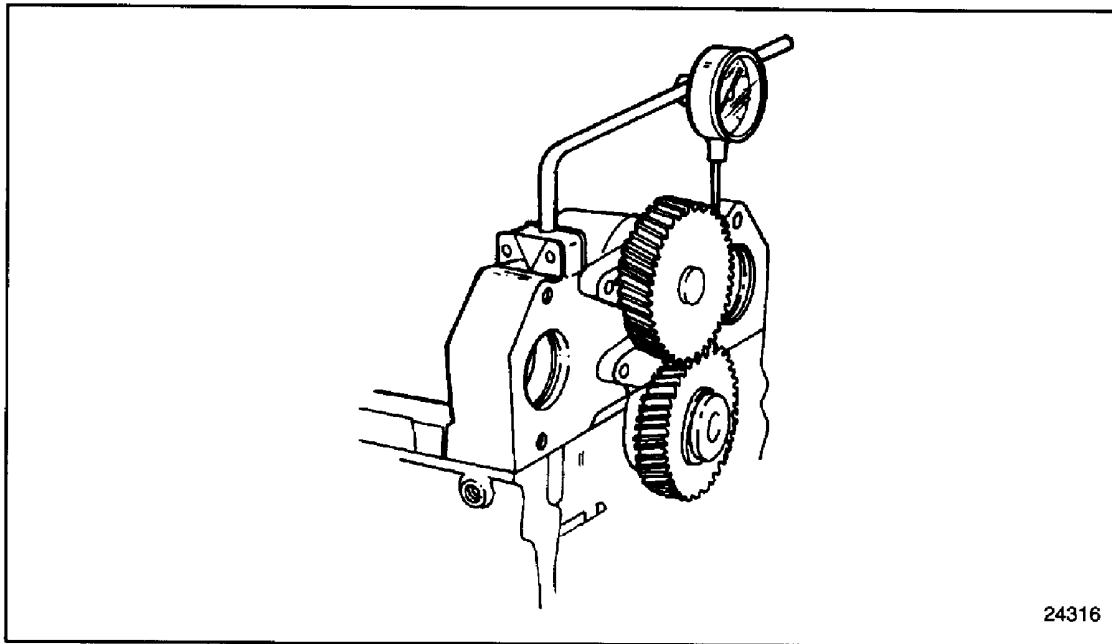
Crankshaft Timing Gear-to-Oil Drive Gear Lash Measurement
